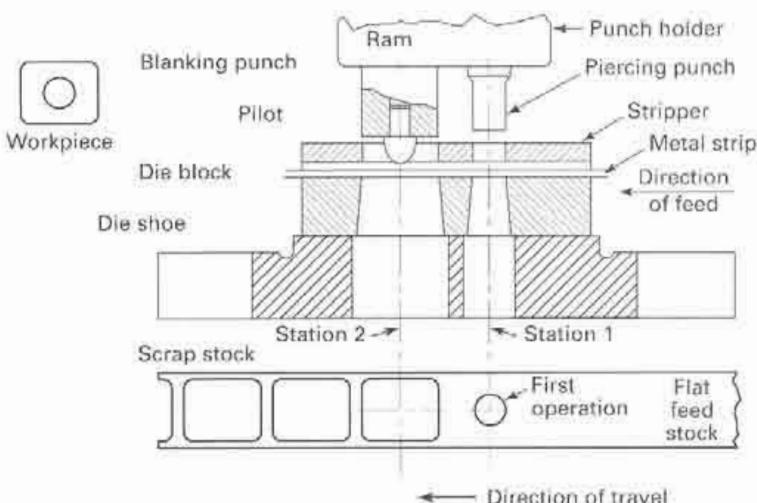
Progressive piercing and blanking die for making a square washer. Note that the punches are of different length.
